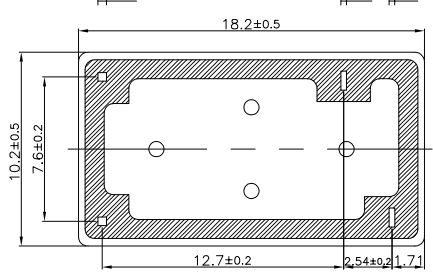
FIGURE FOR PRINTED CIRCUIT BOARD PROCESSING (BOTTOM VIEW)
